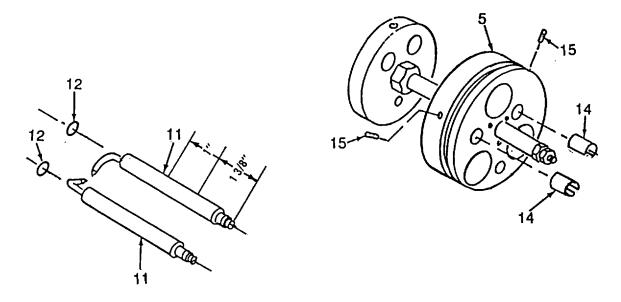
Burner Assembly (Sheet 3 of 5)
